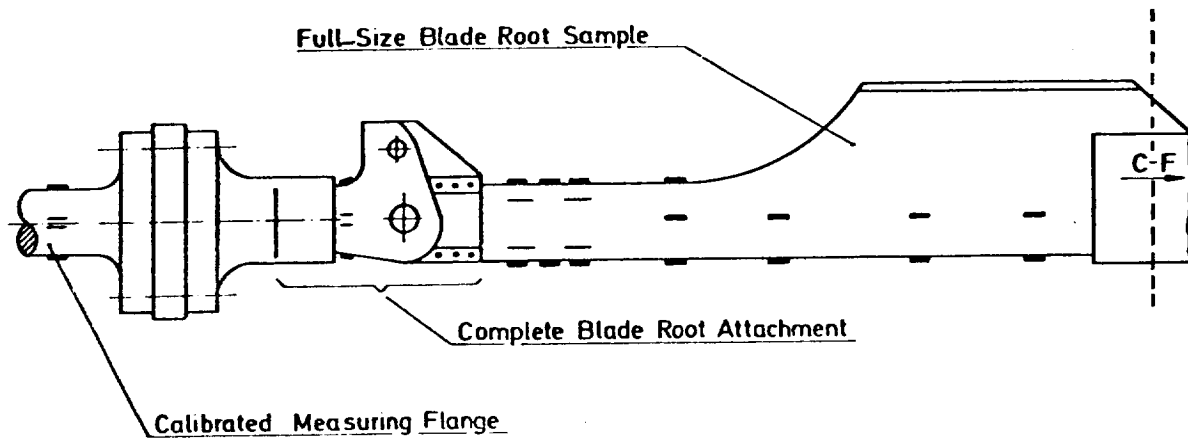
Glass/epoxy BO-105 rotor blade (from ref. 62).
